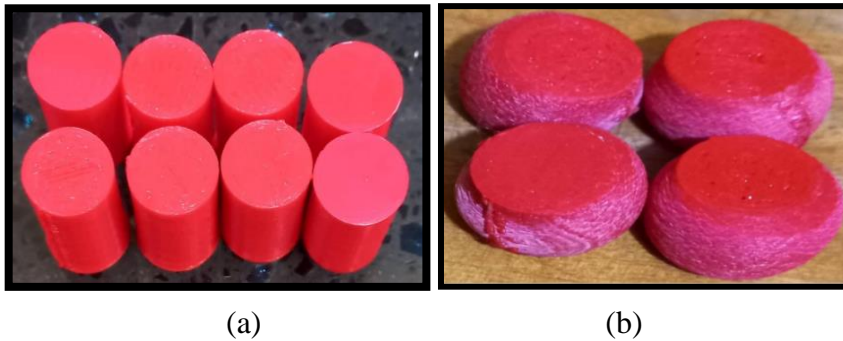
Prepared PLA Compressive test samples (a) PLA test samples before testing and (b) deformed PLA test samples after compressive testing
